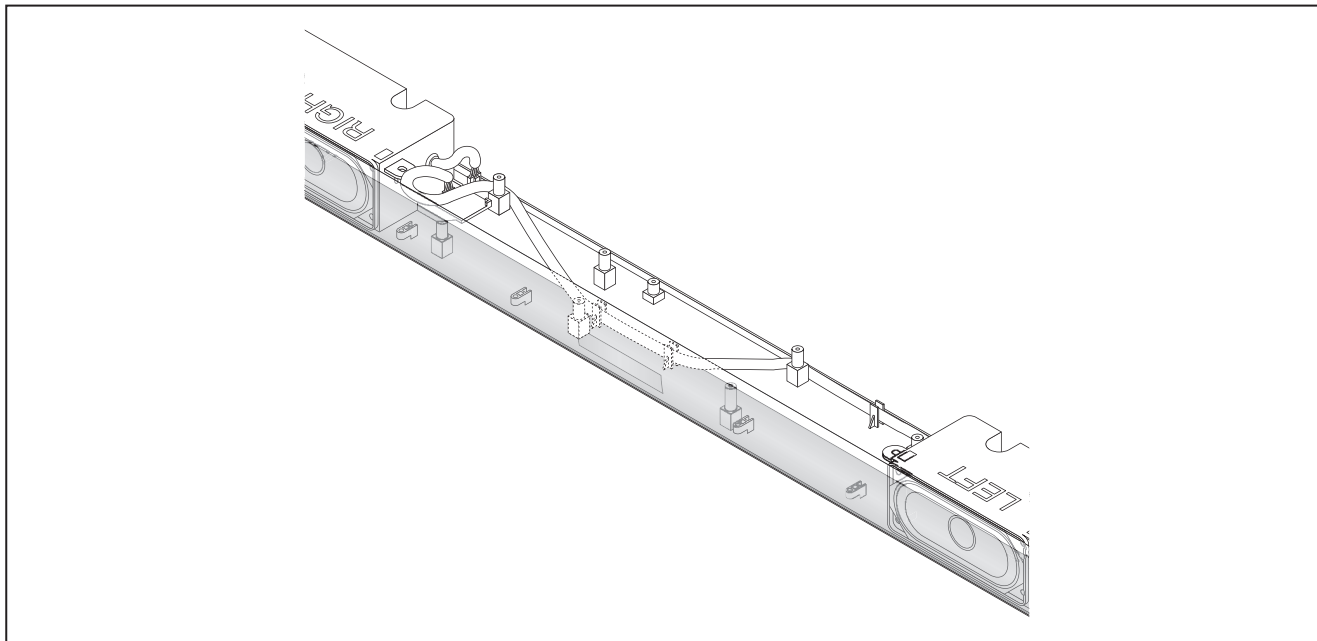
(1). < Speaker network cable from SPK Chamber L/R Assembly to MAIN PCB >
